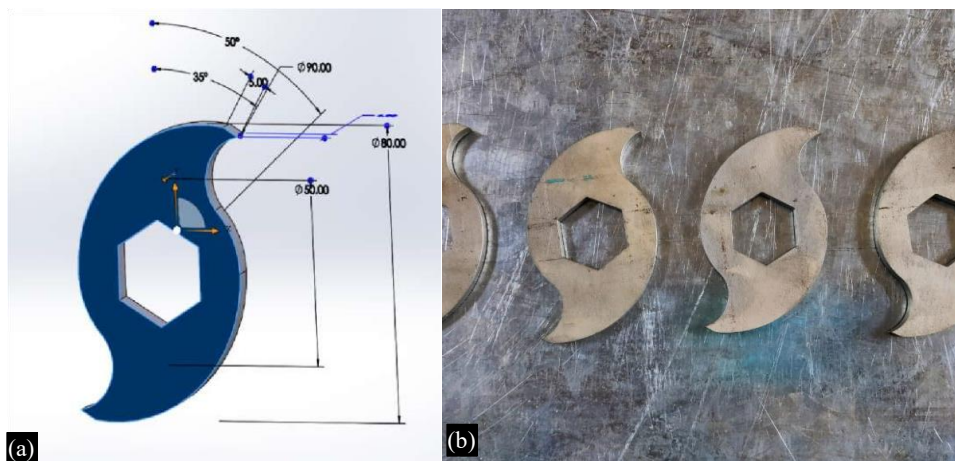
(a) Design of rotary blade; (b) Fabricated rotary blade
